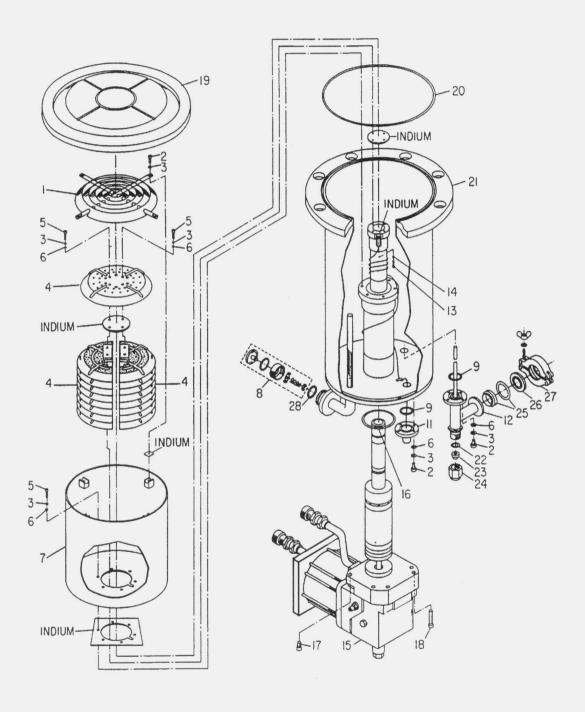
Exploded View of Cryo-Torr 8 Cryopump
